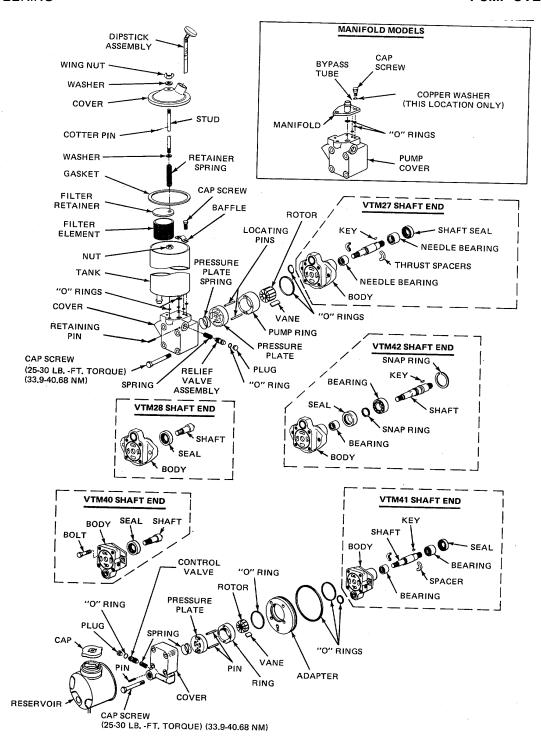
VTM27, VTM28, VTM40, VTM41, and VTM42 Pump Exploded Views
